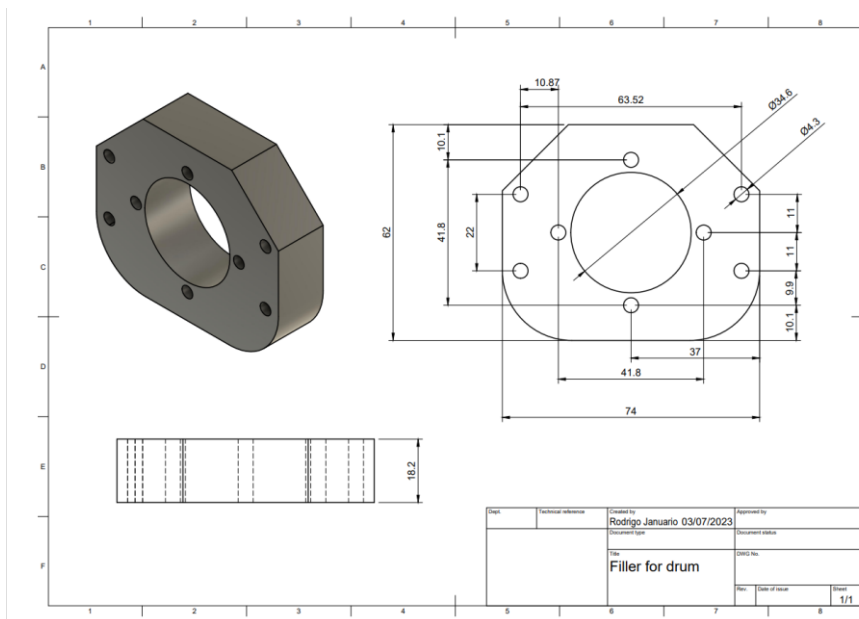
Drawing filler for right arm of the drum, and all its measurements.
